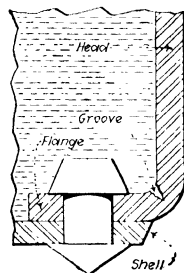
Groove corroded in fillet of head flange.
